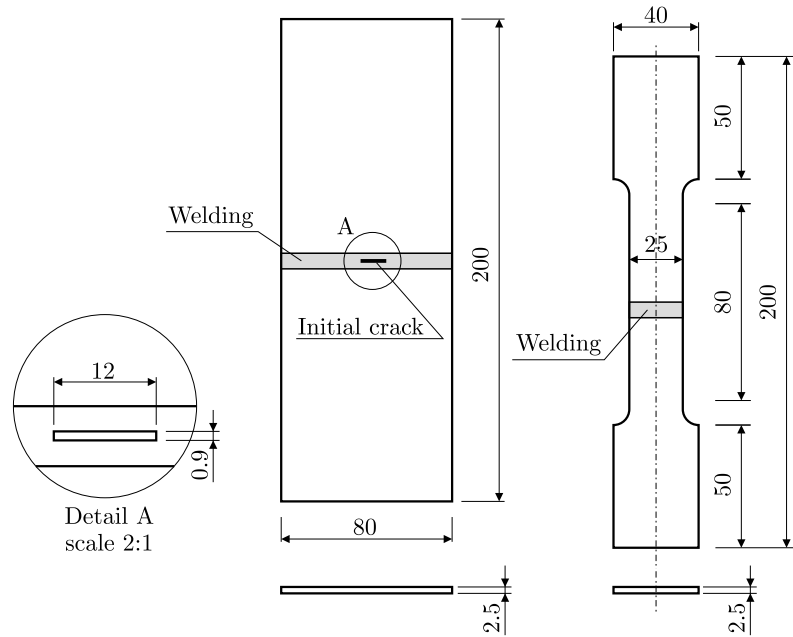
Specimen configuration for tensile and fatigue crack propagation tests (all units in millimeters)
